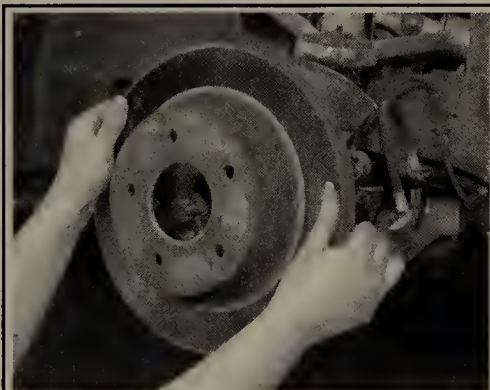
Install the rotor by positioning it over the lug studs, and pushing it into place—front rotor shown
